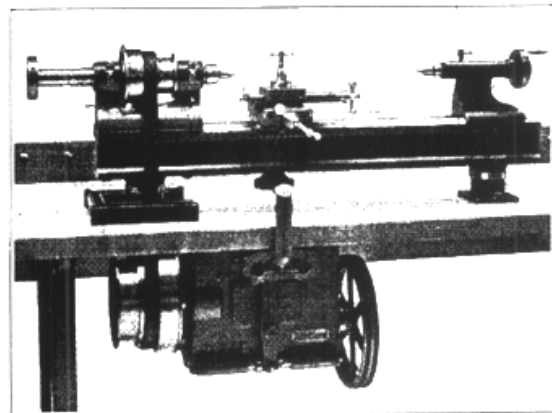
Rivett Series 507 lathe on bench with Speed Box Motor Drive, hand lever control, Jack Pedestals, and Belt Guard
